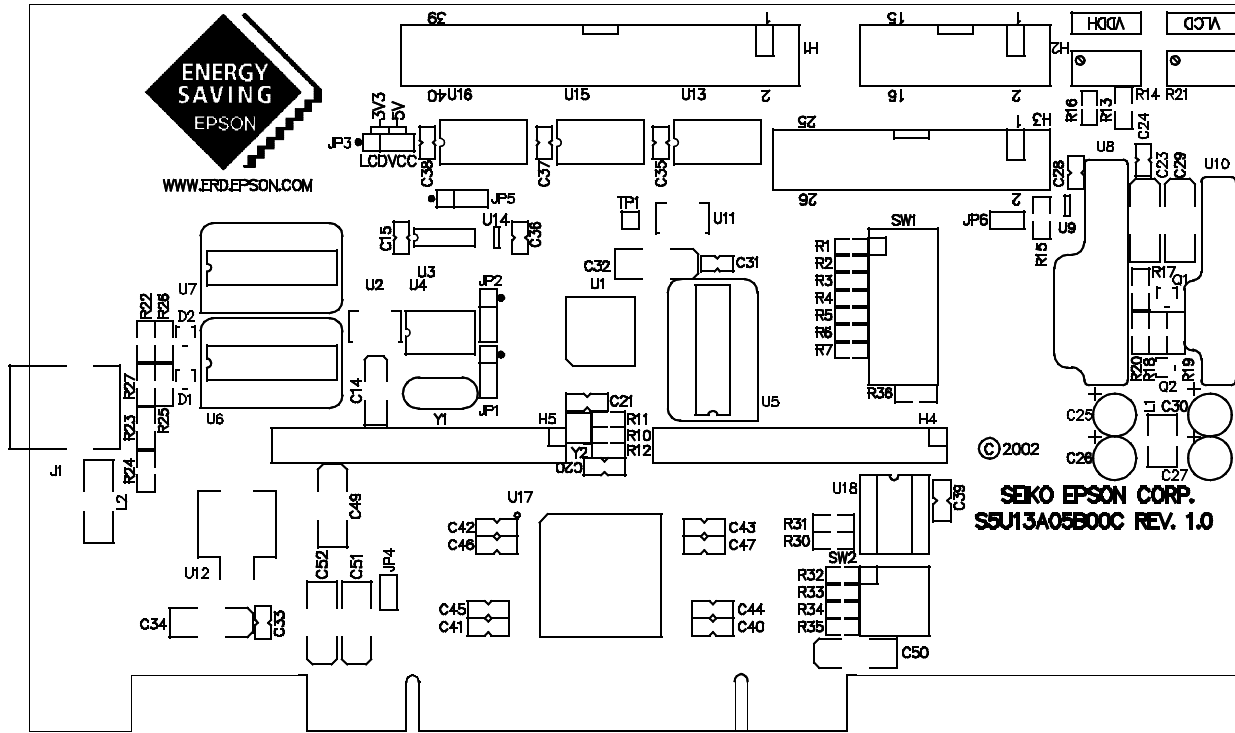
S5U13A05B00C Board Layout (Top View)
